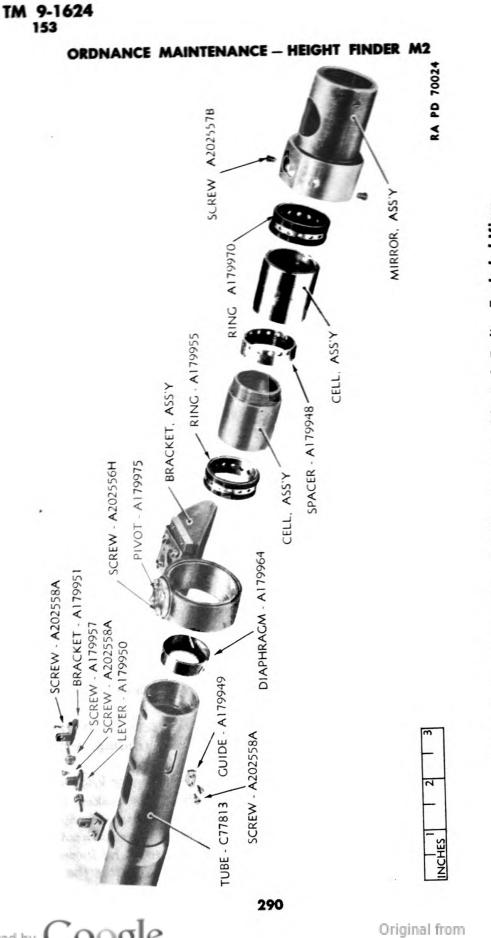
Internal Target Collimator Assembly (Left End) – Exploded View
